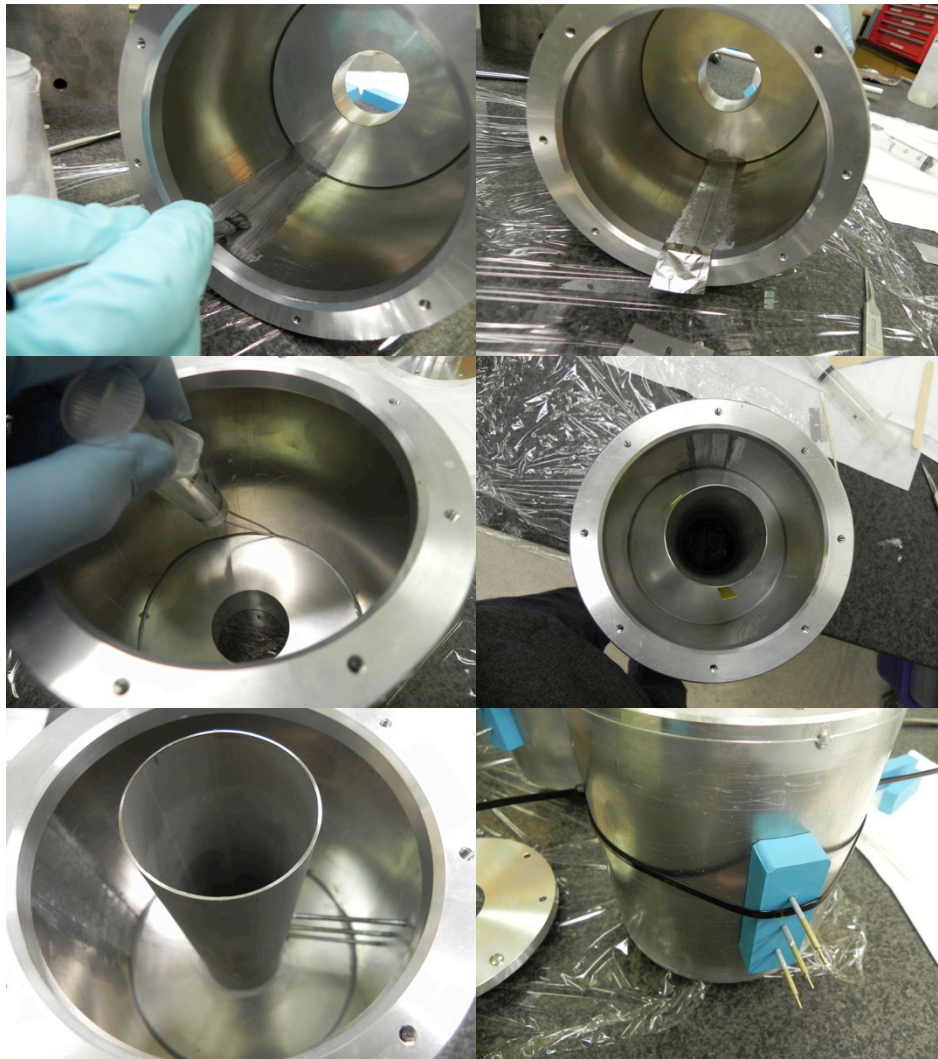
A series of photographs showing the preparation of the assembly canister showing application of the RTV along the weld seam (upper left), placement of an aluminum foil at the seam (upper right), placement of the RTV along the case seams (center left), placement of the
